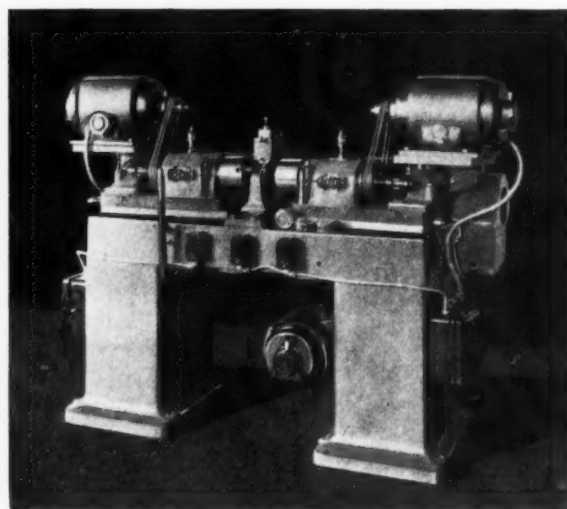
Coulter Automatic Equipped for Machining Gate Valve Bodies and Wedges
